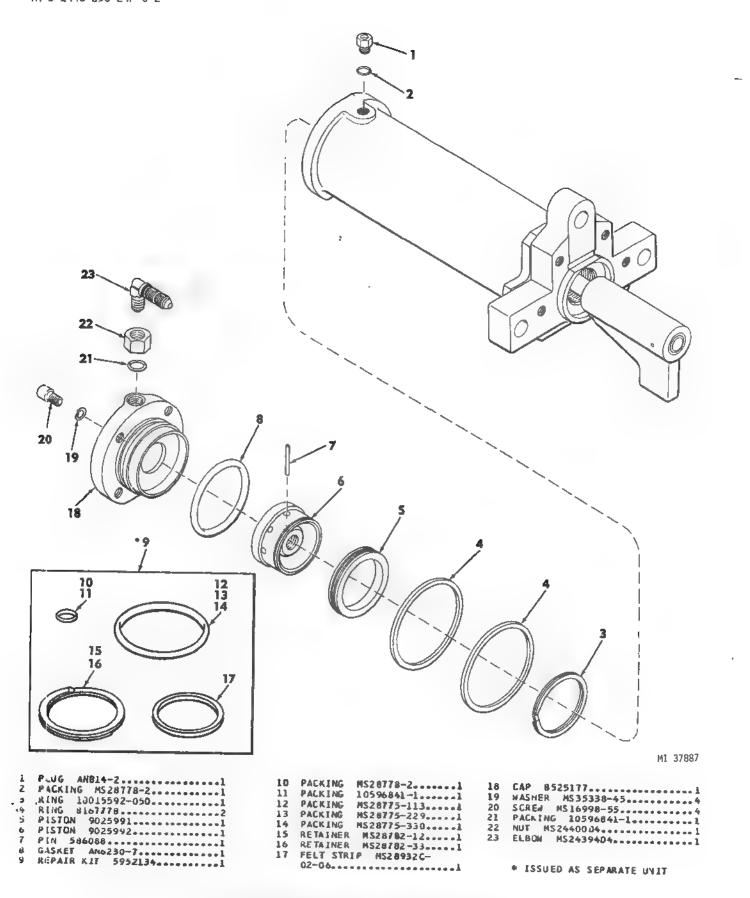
CYLINDER ASSEMBLY, ACTUATING, LINEAR /8521441 AND 8521453/ /SEE FIGURE 9 FOR NEXT HIGHER ASSEMBLY/
